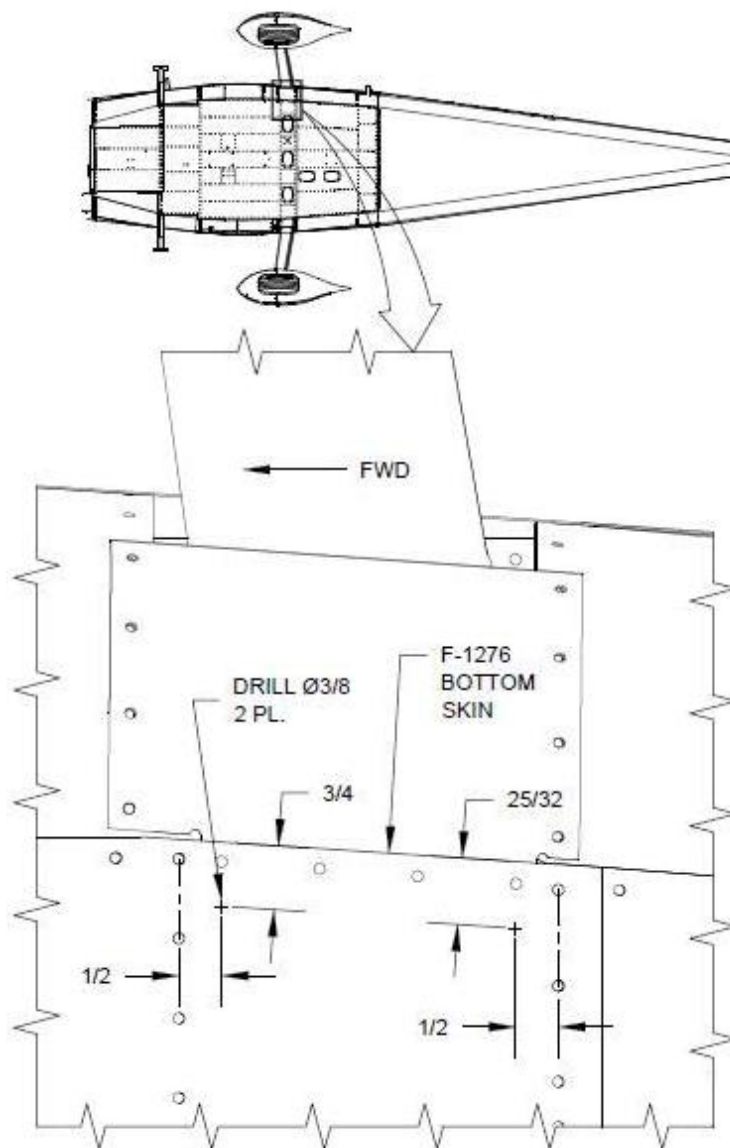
DRIFT AND SOCKET ACCESS HOLES
